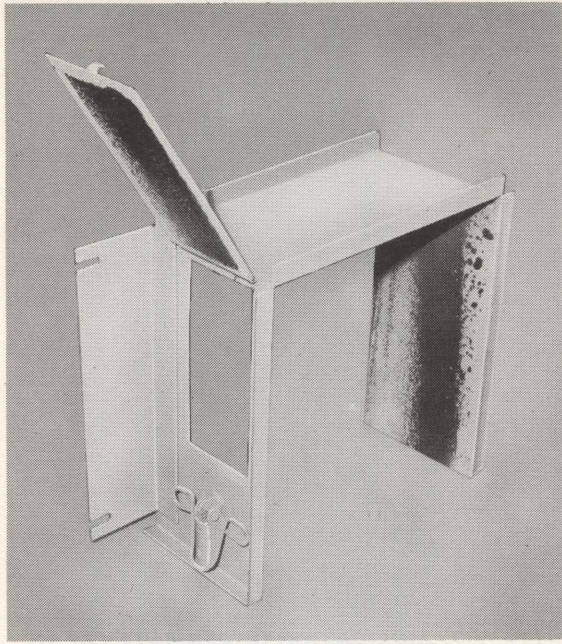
GUARD OVER COMPRESSOR COUPLING.
